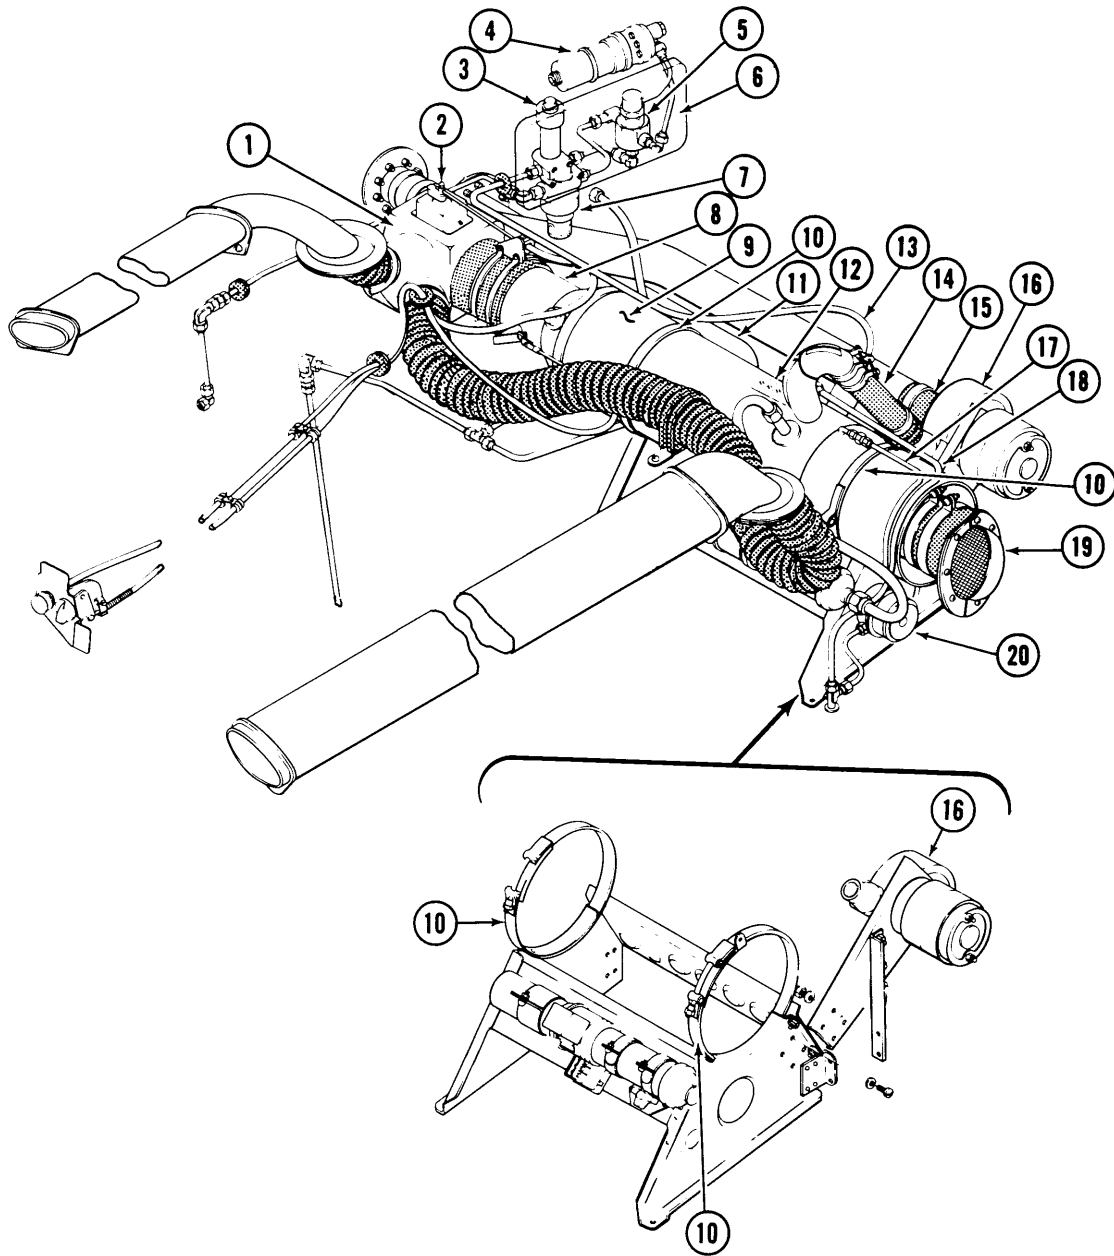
Bleed Air Valve Assembly — Bleed Air Heater (Sheet 1 of 2)
